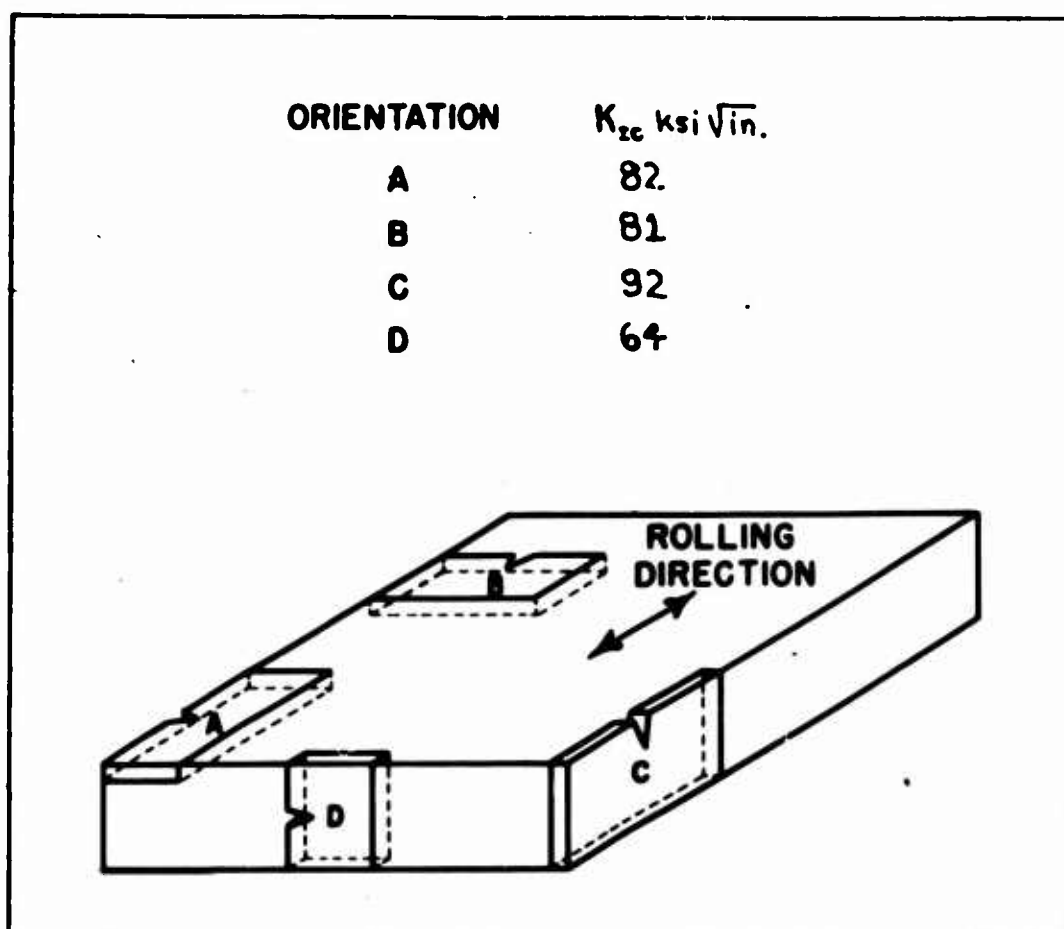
Orientations of Fracture Toughness Specimens Cut from 1 inch thick Plate of Maraging (250) Steel
